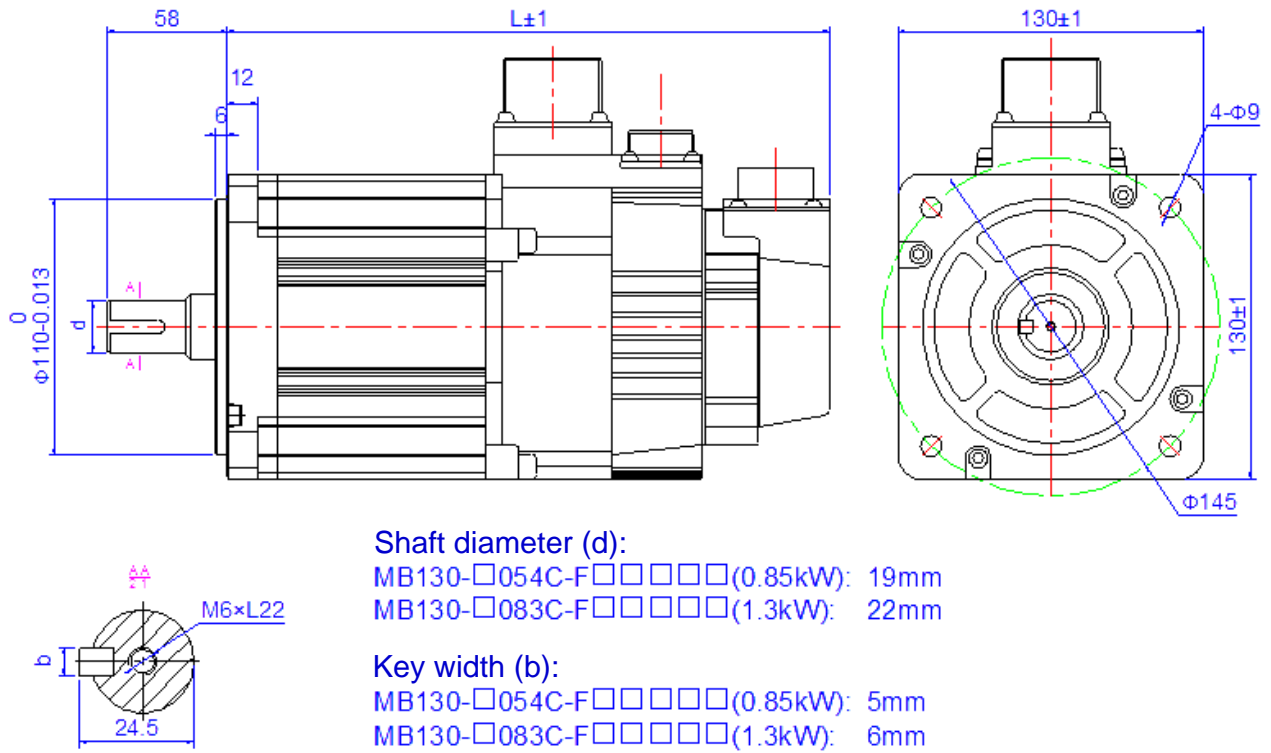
Outline dimensional drawing of MB130 series (0.85kW/1.3kW, with brake)
